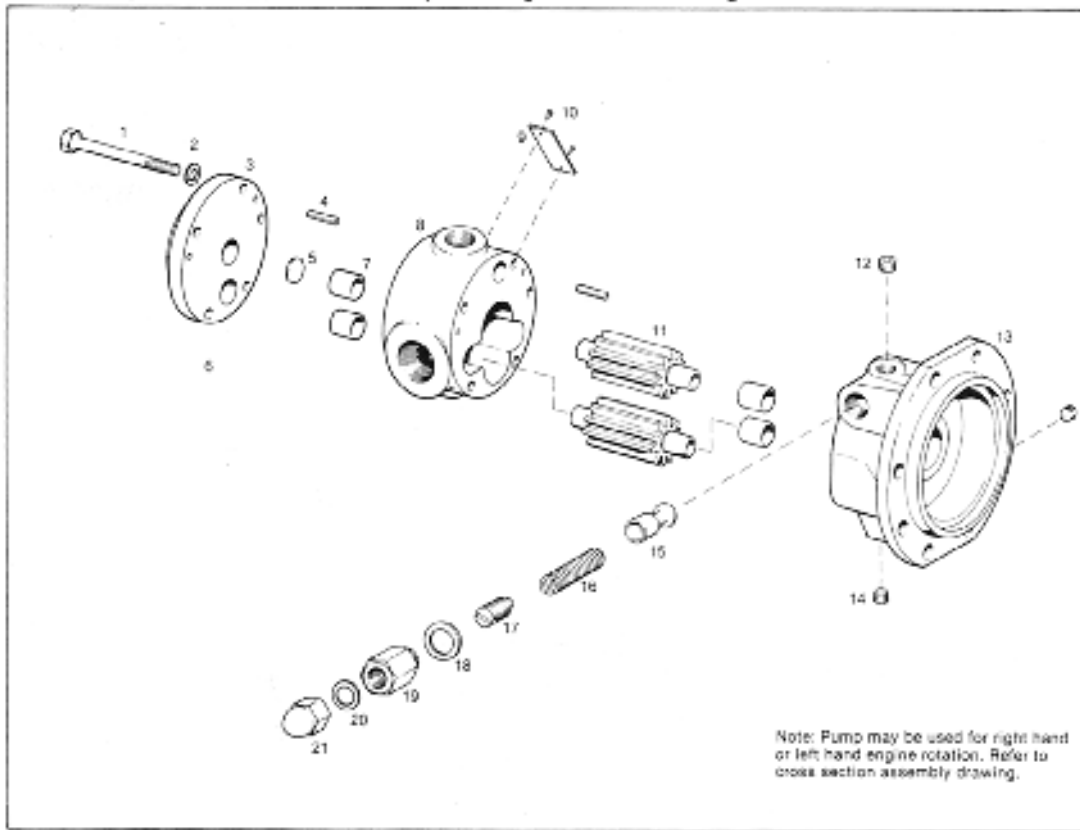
'Heavy Duty' Oil Pump no. 1-13850-4000
